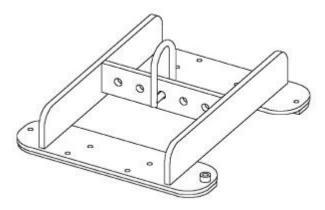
Engine Lifting Fixture 8427 Courtesy of CHRYSLER LLC
